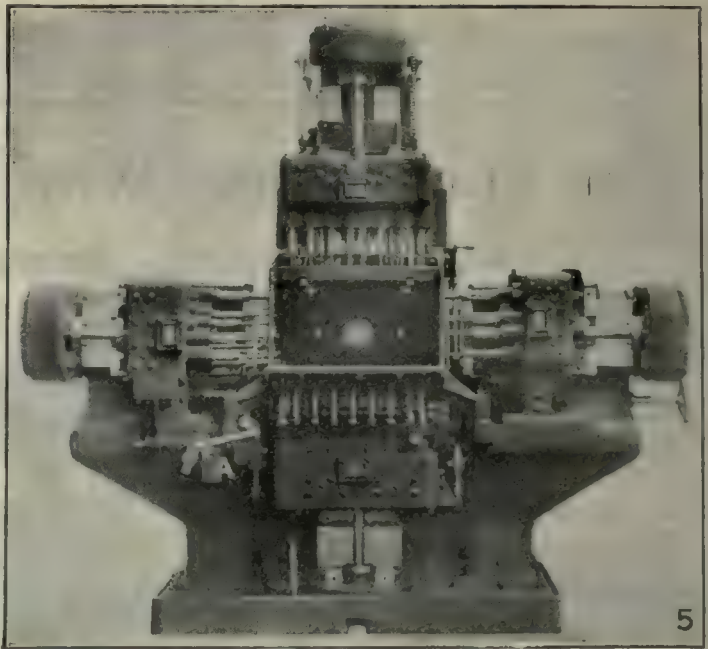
LATEST MODEL OF FOUR-WAY DRILLING MACHINE
